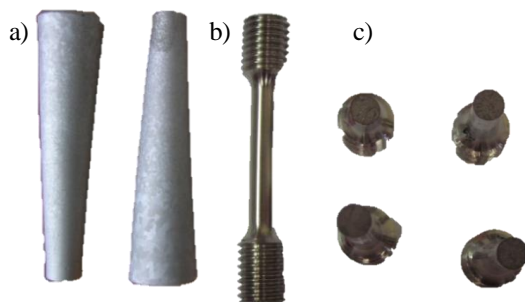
(a) Casting samples prior to machining. (b) sample after machining (c) sample after the strength test
